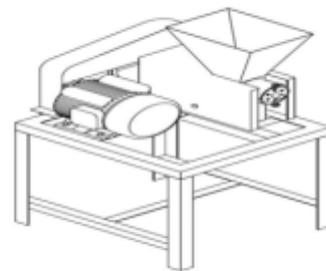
Isometric View of the Fish Feed Pelletizing Machine
